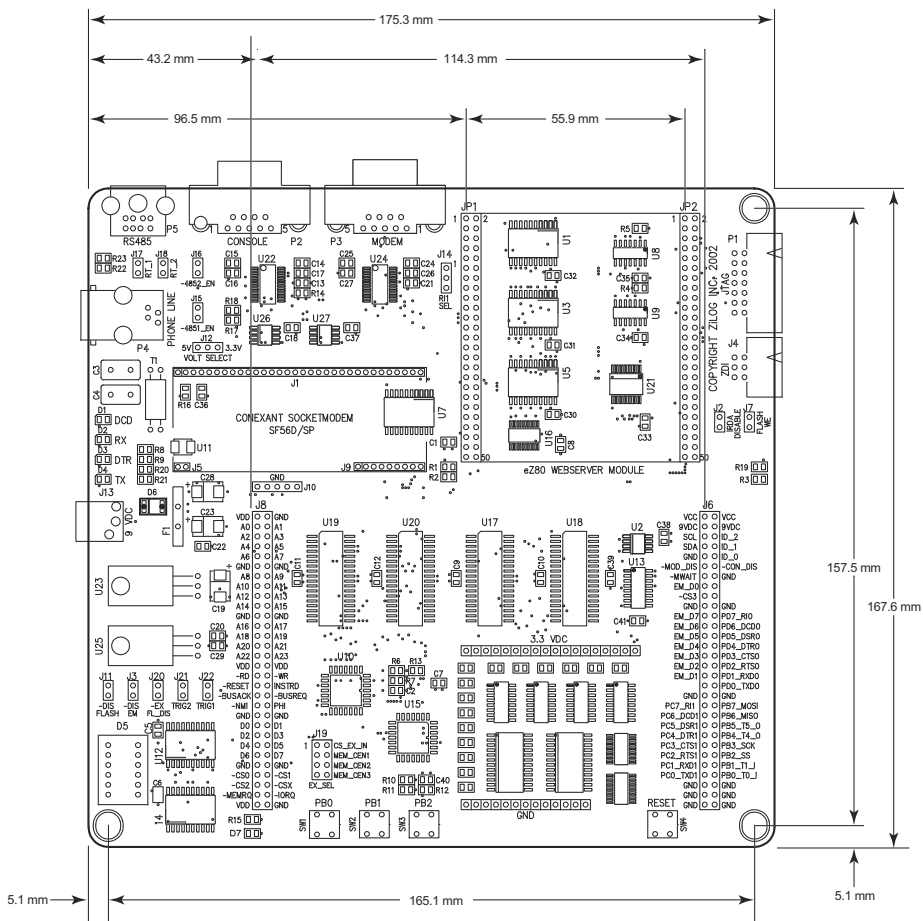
Physical Dimensions of the eZ80[®] Development Platform
